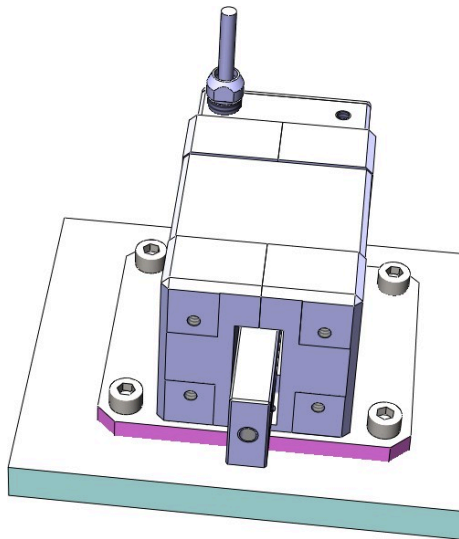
Example of mounting using the mounting flange A (spatial view)
